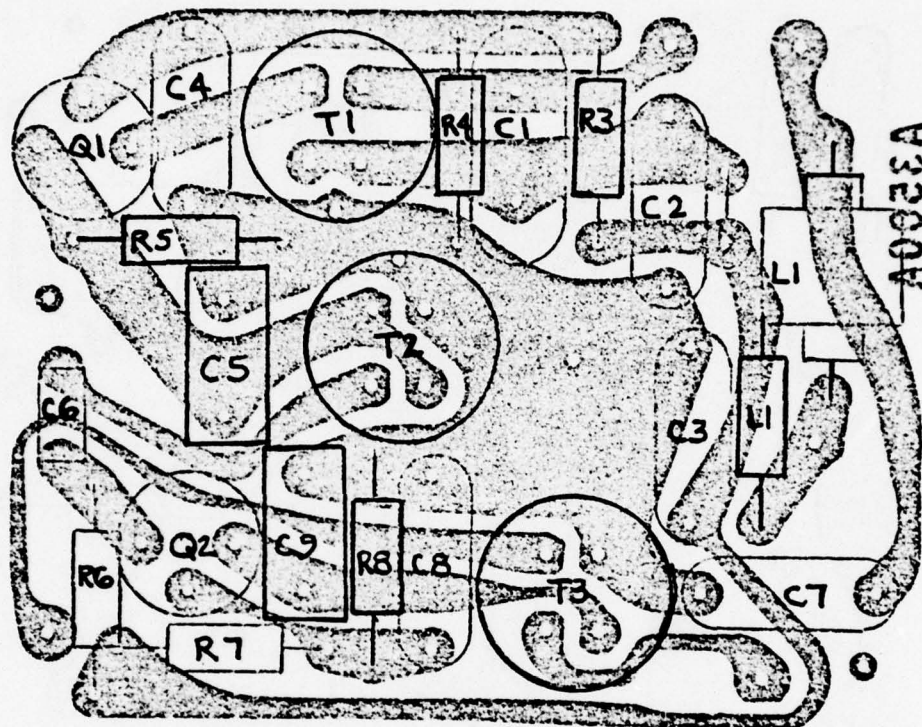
P.C. BOARD LAYOUT FOR THE A3500A CRS THIRD IF AMPLIFIER AND LIMITER ASSEMBLY
